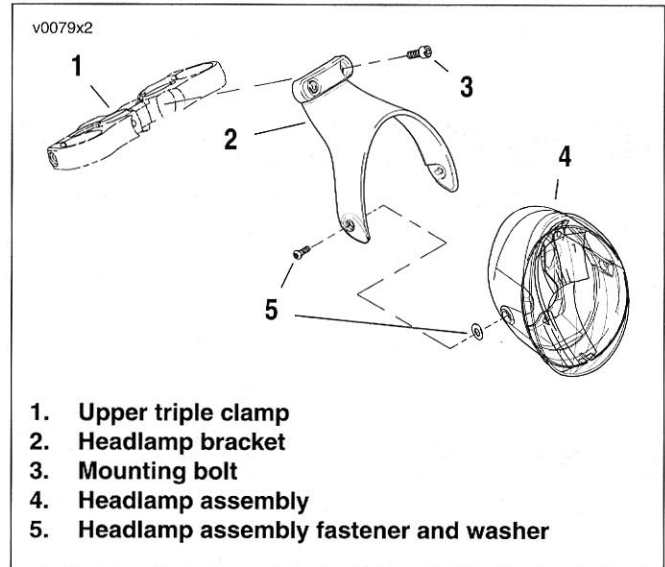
Headlamp Bracket and Headlamp Assembly
